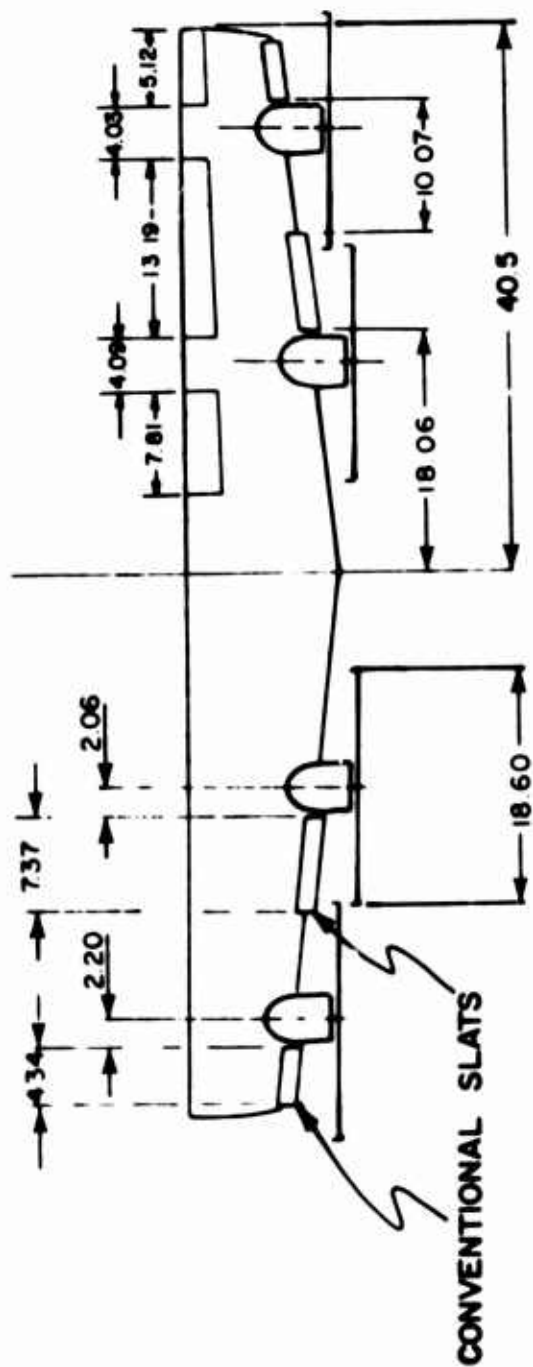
Model Wing Airfoil Section, Showing Slat, Flap, and Aileron Arrangement.
